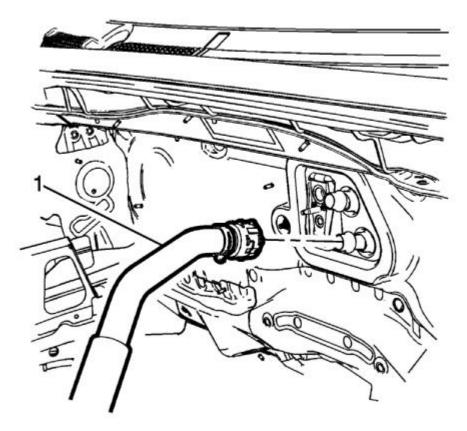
Heater Inlet Hose Courtesy of GENERAL MOTORS COMPANY
